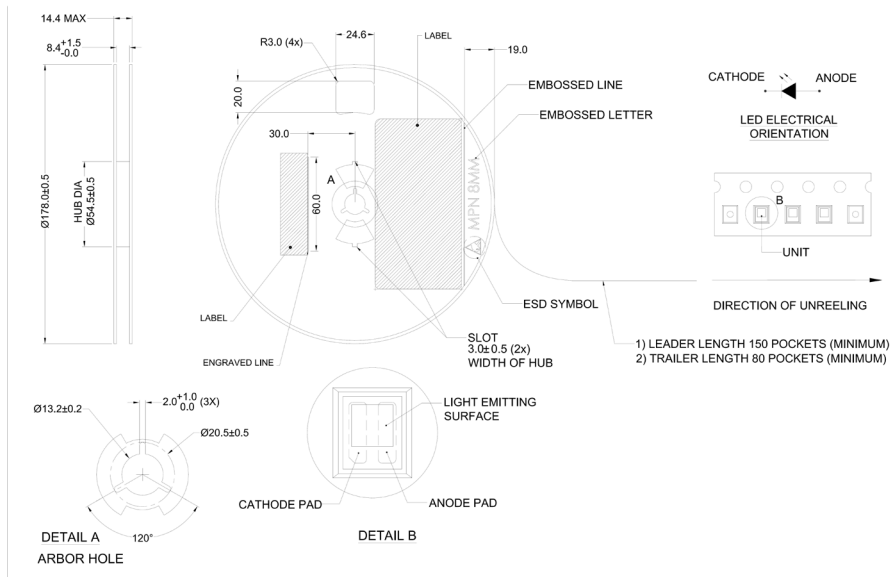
Reel dimensions for LUXEON FX2 PC Amber
